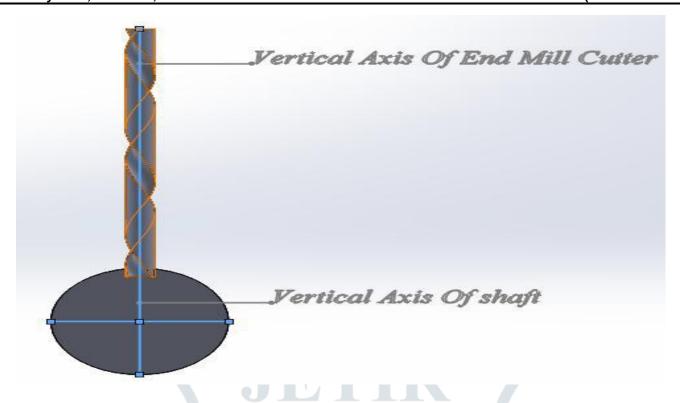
Axis of Shaft and Axis of End mill cutter both are coincide with each other.
